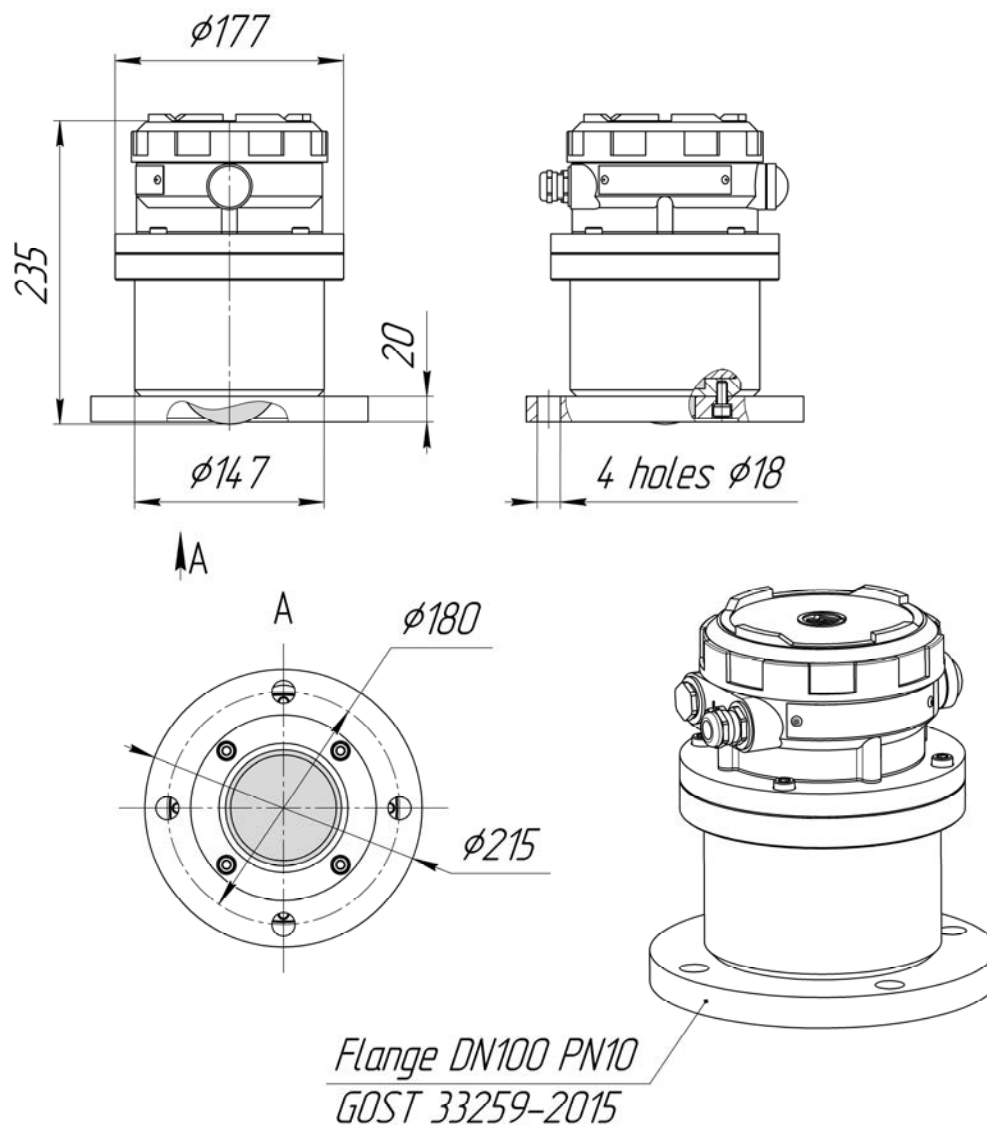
Level transmitter with lower mounting flange DN100 for installing the level transmitter without immersing the antenna inside the tank.
